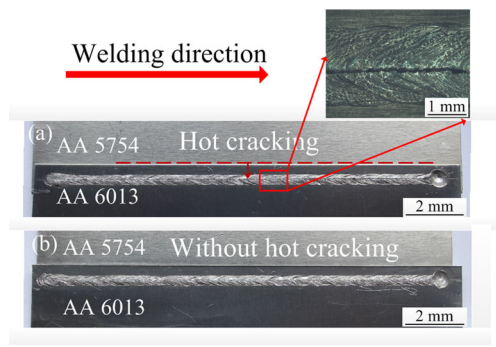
Typical top view of the specimens. a $P=4.50$ kW, $V=3.6$ m/min, $D=10$ mm, a long cracking exists on the surface. b $P=4.50$ kW, $V=3.3$ m/min, $D=10$ mm, without visible cracking
